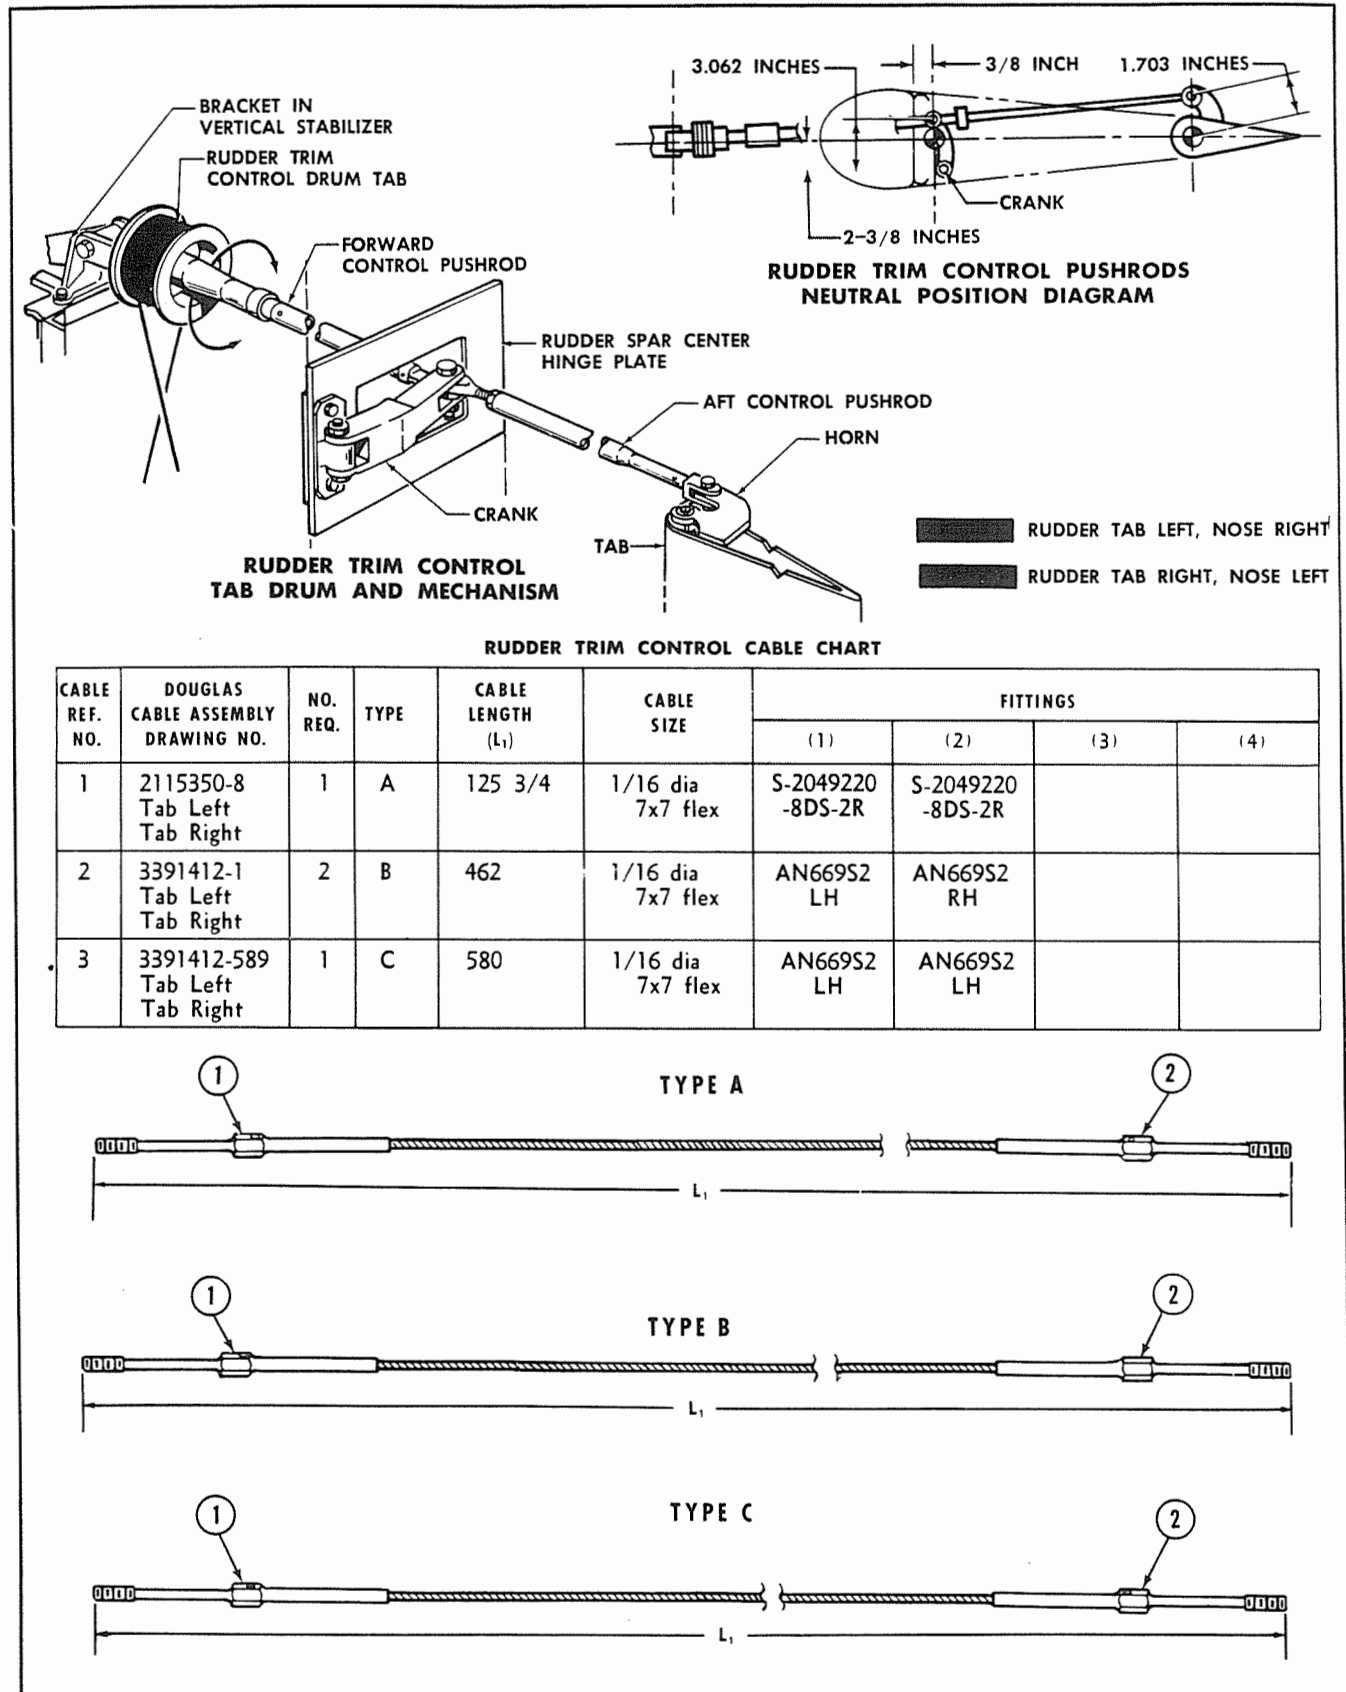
(Sheet 6 of 6 Sheets). Rudder Trim Control System – Trim Tab Mechanism, Cable Chart, and Cable Assemblies
